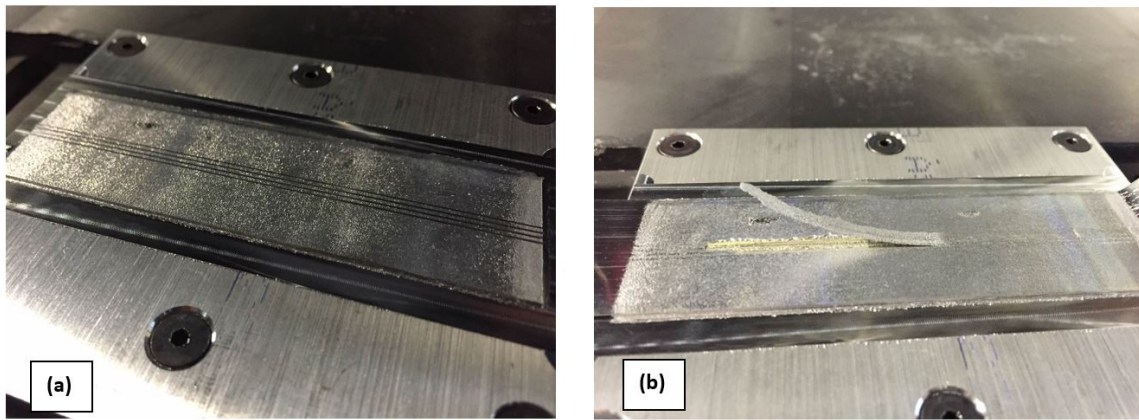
Initial attempt to embed four aramid threads with varying channel depths, (a) before welding, (b) after welding.
